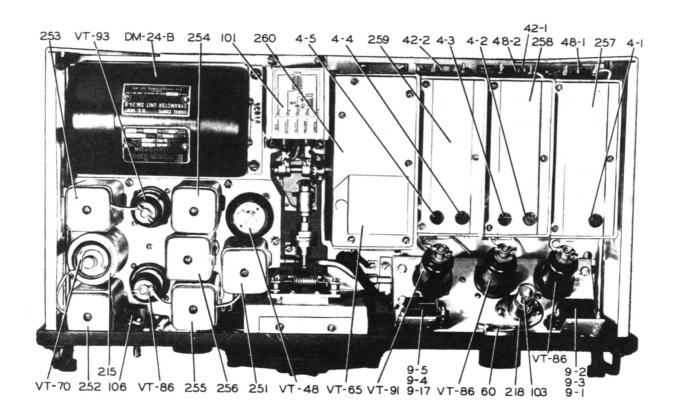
RADIO RECEIVER BC-224-B: TOP VIEW OF CHASSIS
